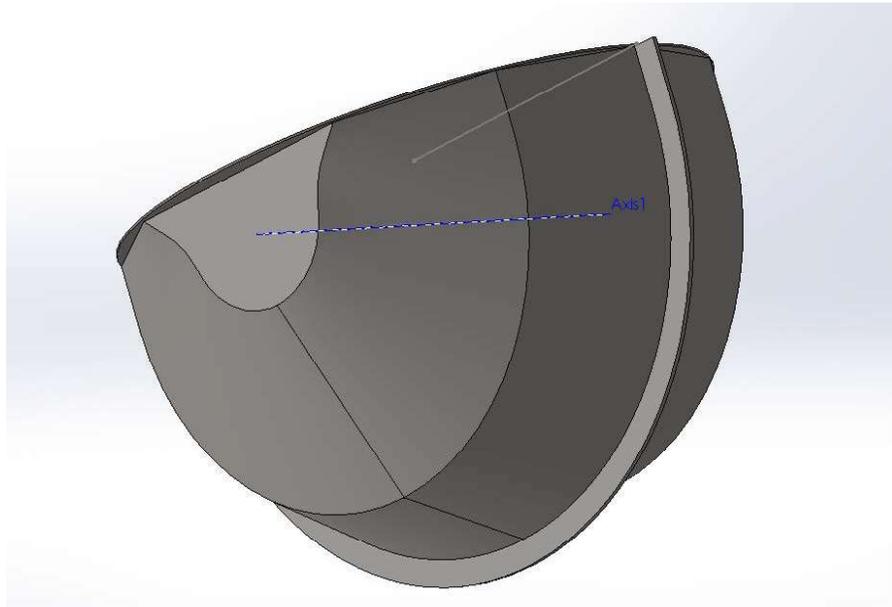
Cross Section of Antenna at Low ( $12^\circ$ ) Elevation Angle
